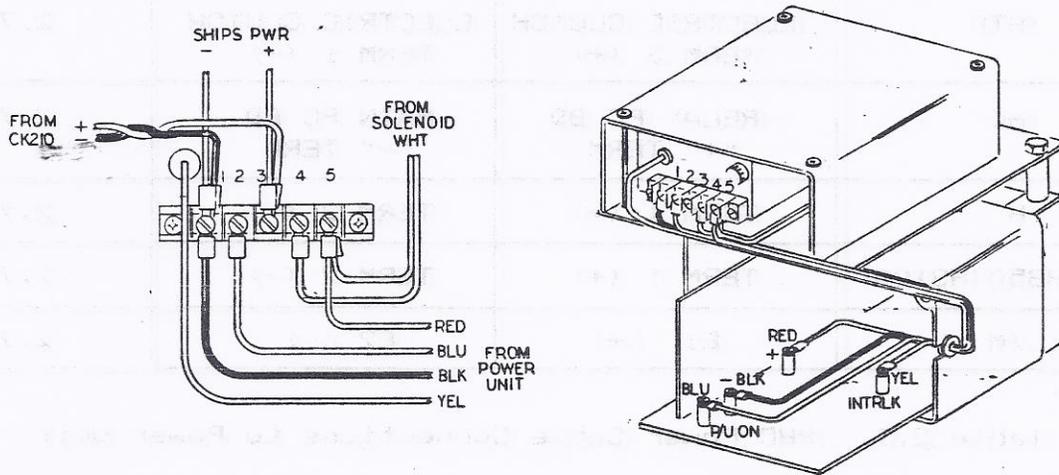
Electric Clutch Wiring, STD Power Unit
